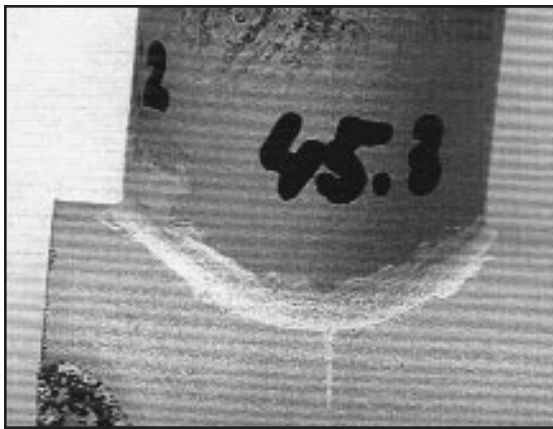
Joint made to mild steel tubes using 44Ag-30Cu-26Zn brazing alloy.
